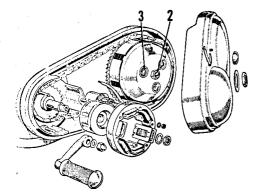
The clutch adjusting screw located under the primary chain cover on early models is shown at (2).
